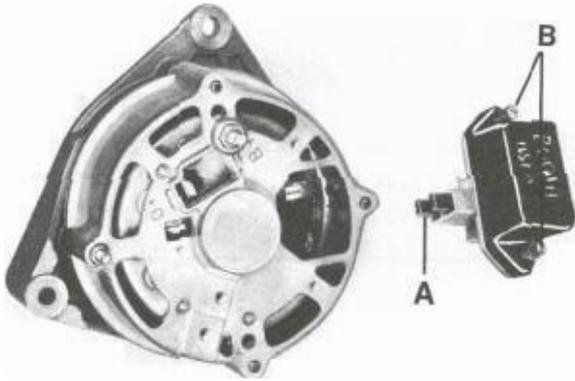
Voltage regulator and brush holder removed from back of alternator. The brushes are at A. Remove the holder screws at B.
